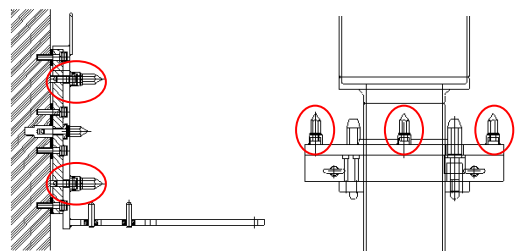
Side view of the in-pool assembly installed at CN vertical hole of the reactor vessel.
